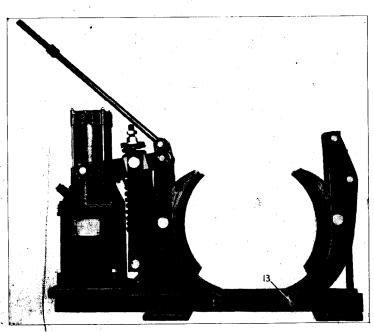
Type HI Brake Showing Case of Removing Wheel
